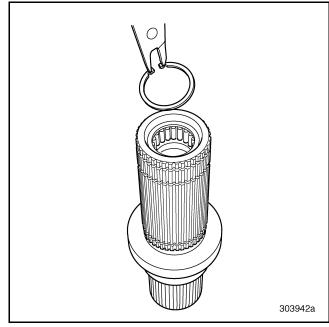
Installing Spigot Bearing Snap Ring (T313L/T318L Shown)
